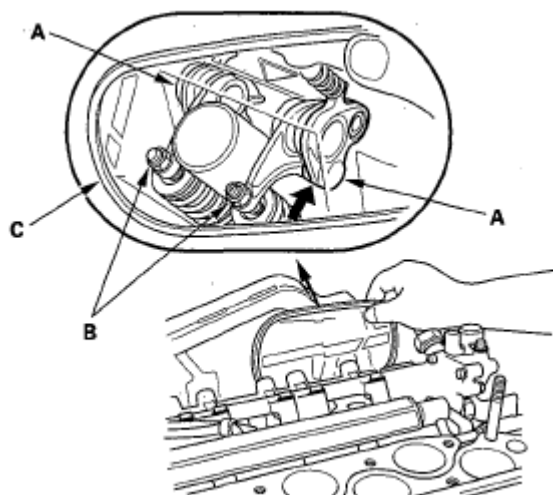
Identifying Exhaust Secondary Rocker Arm
